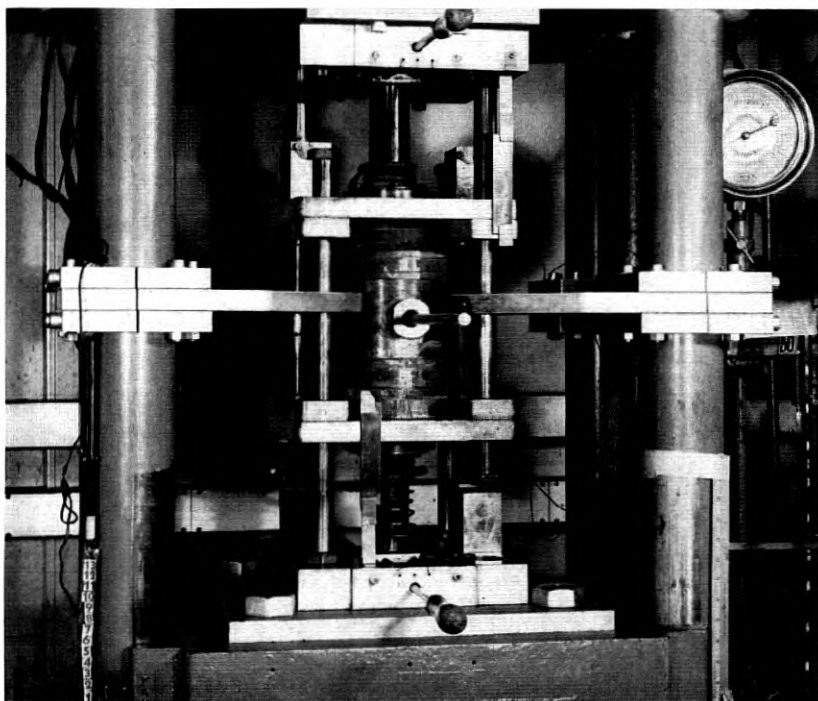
Front view of experimental extrusion equipment installed in press.
